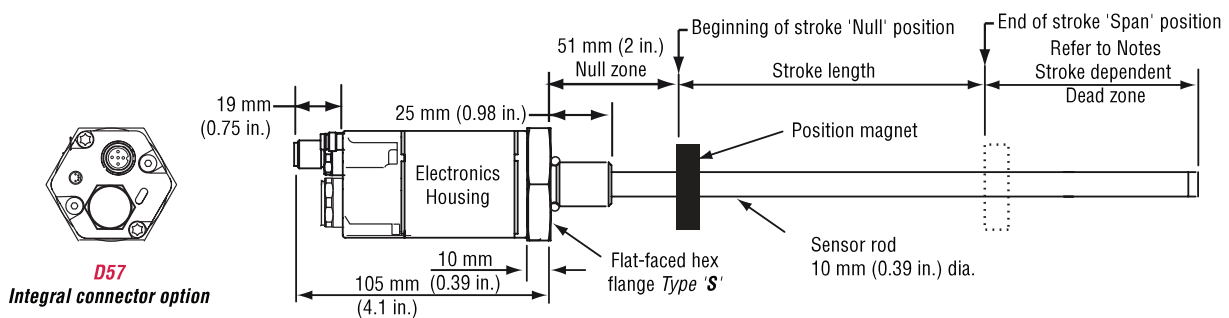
Model RH Rod-style sensor dimension reference (shown with D57 integral connector options)
